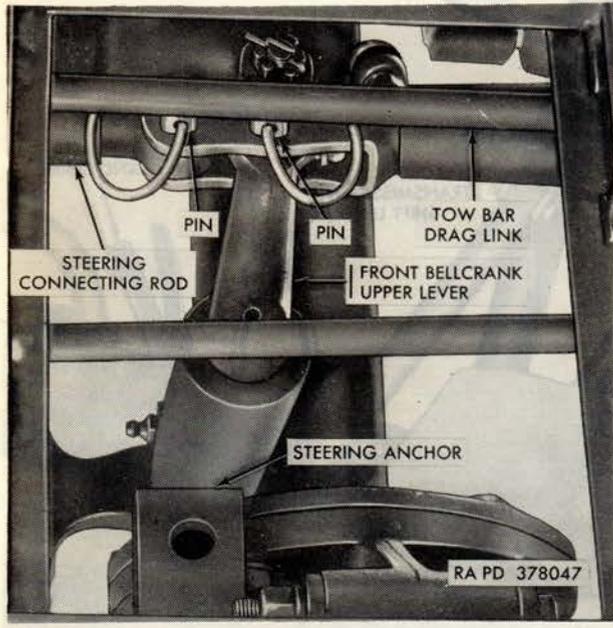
Two- and four-wheel steering connections steering access opening lid removed and four-wheel steering connected.
